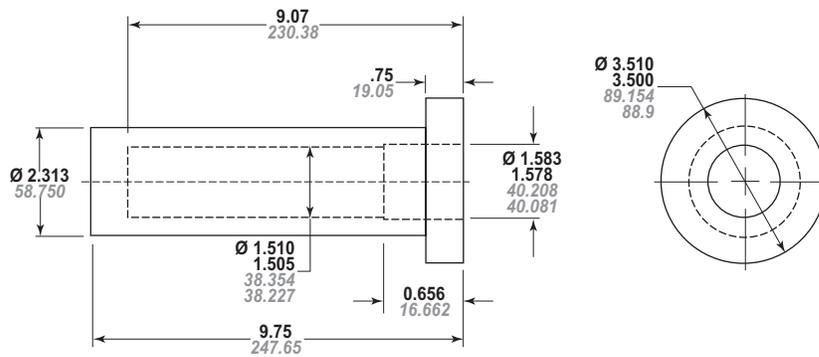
Model 4500/4600 Bearing Installation Tool
